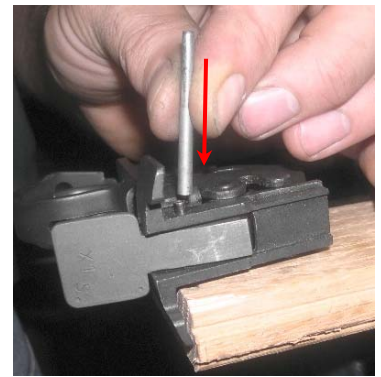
Seat Pivot Pin Flush to Housing Using Large End of Taper Pin
